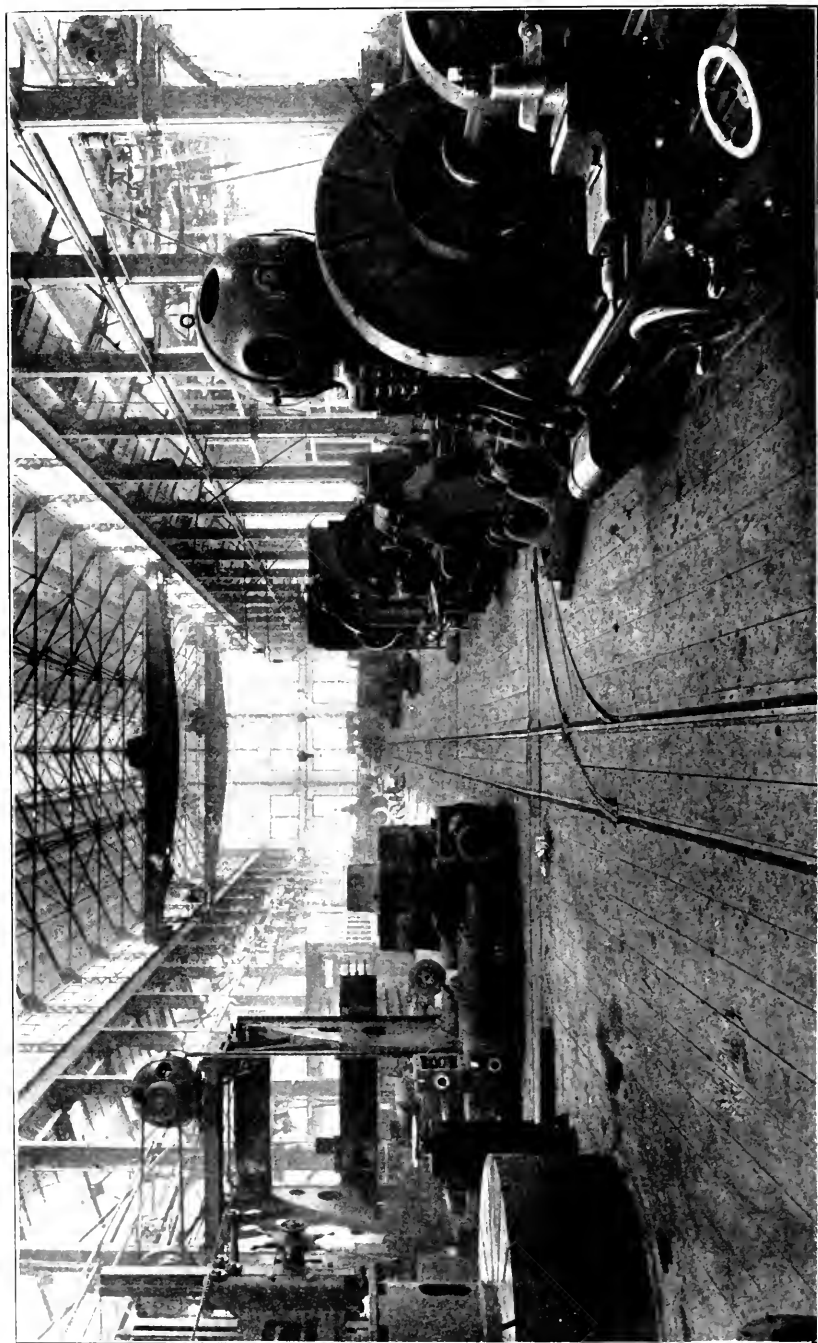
Interior of a modern machine-shop, showing location of motor-driven tools under traveling crane.
